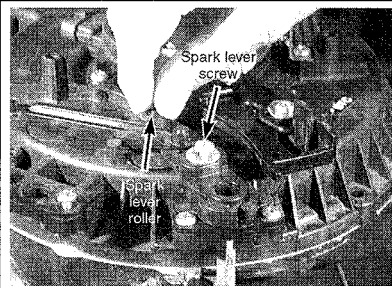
Loosen the spark lever screw and push the roller away from the cam...
